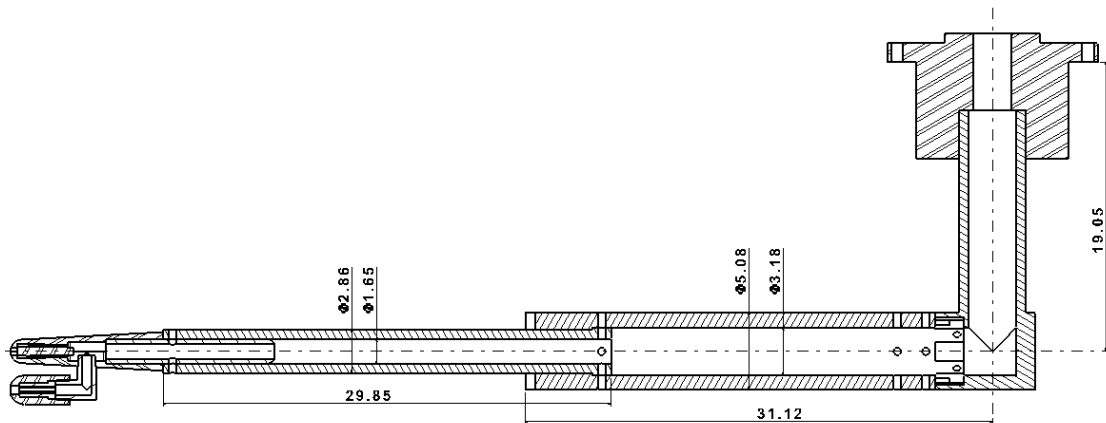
Sting section view with attached rake (dimensions in cm.)
